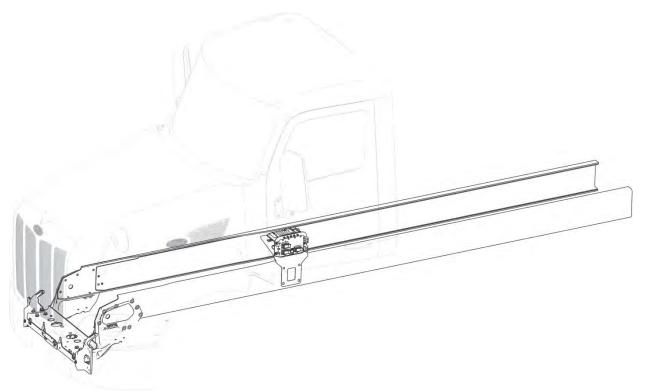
Air Solenoid Bank and Chassis Node
